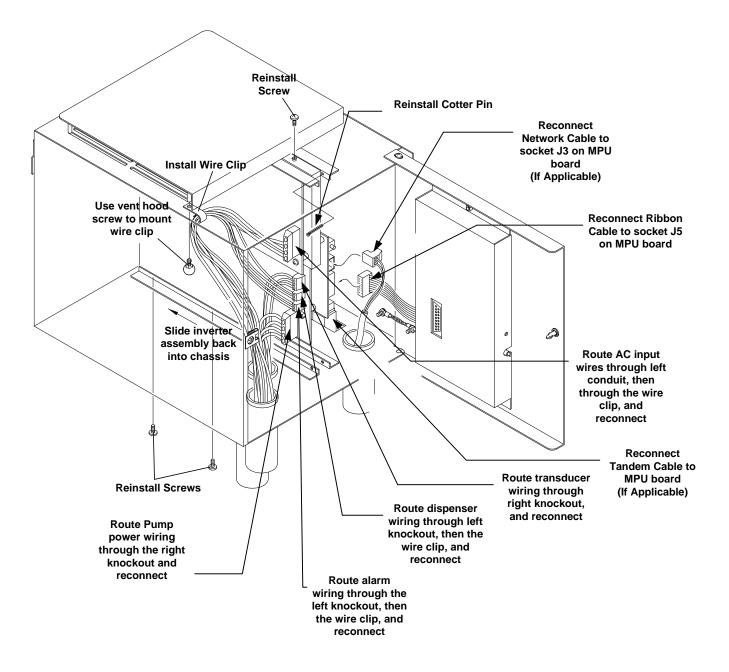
Reinstalling and reconnecting the Inverter Assembly
